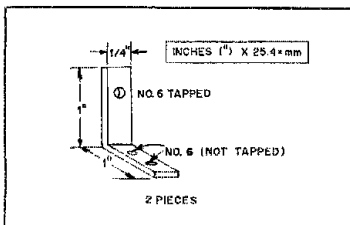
Cut and drill two additional pieces of right-angle stock as shown above.
